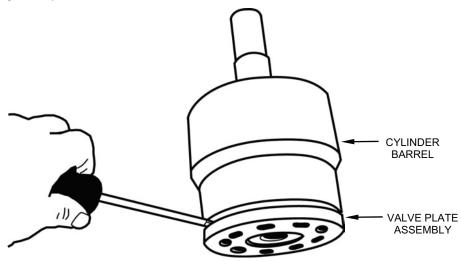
Removing Valve Plate Assembly from Cylinder Barrel.
